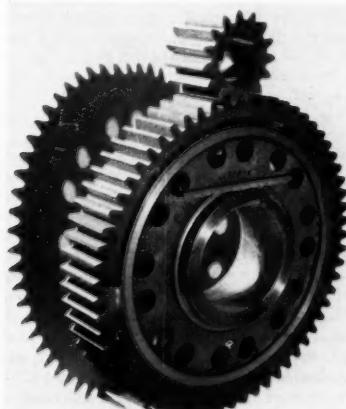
LOCOMOTIVE DRIVE GEARS SHOTPEENED IN REGULAR PRODUCTION
